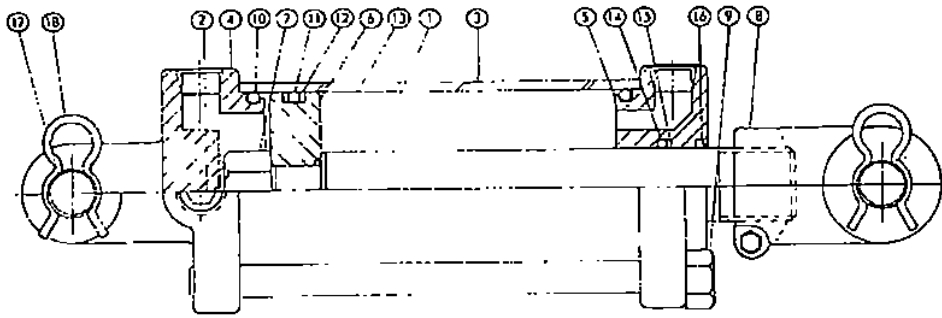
PRINCE HYDRAULIC CYLINDER 4" BORE MODEL PMC-9408
